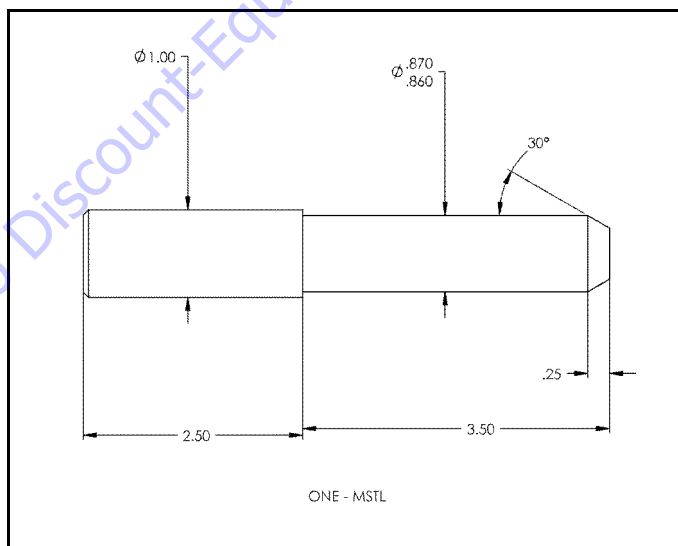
Drift Pin for Lining Up Thrust Washers with Output Planet Gear
